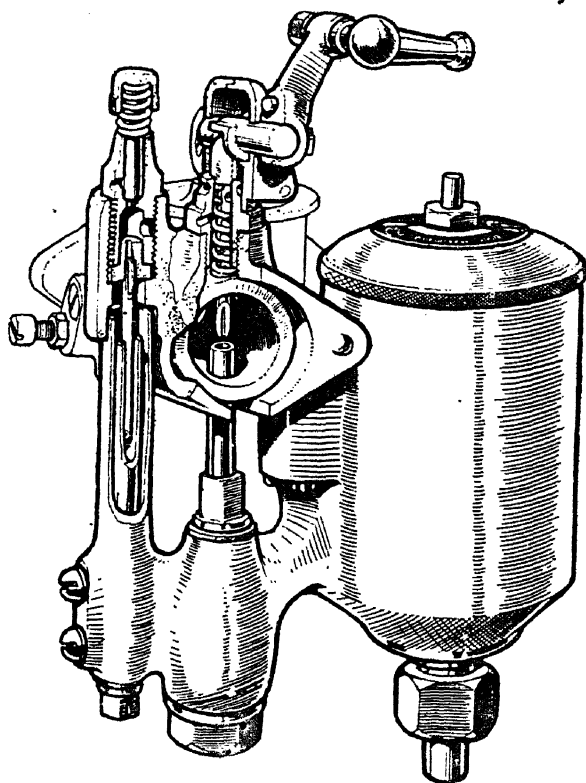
External View of the Sthenos Light Car Model Carburettor.
